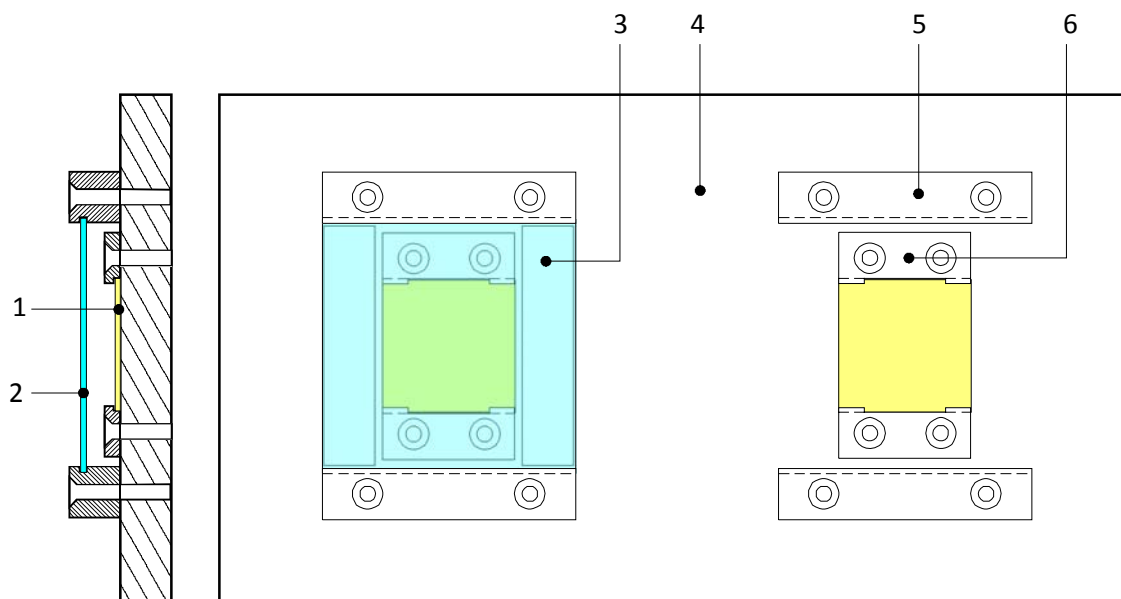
Substrate mount assembly with spore coated glass slide (1), optical filter plate (2), block limiting lateral plasma access (3), PTFE base plate (4), filter plate holder (5), glass slide holder (6). Drawing not to scale.
